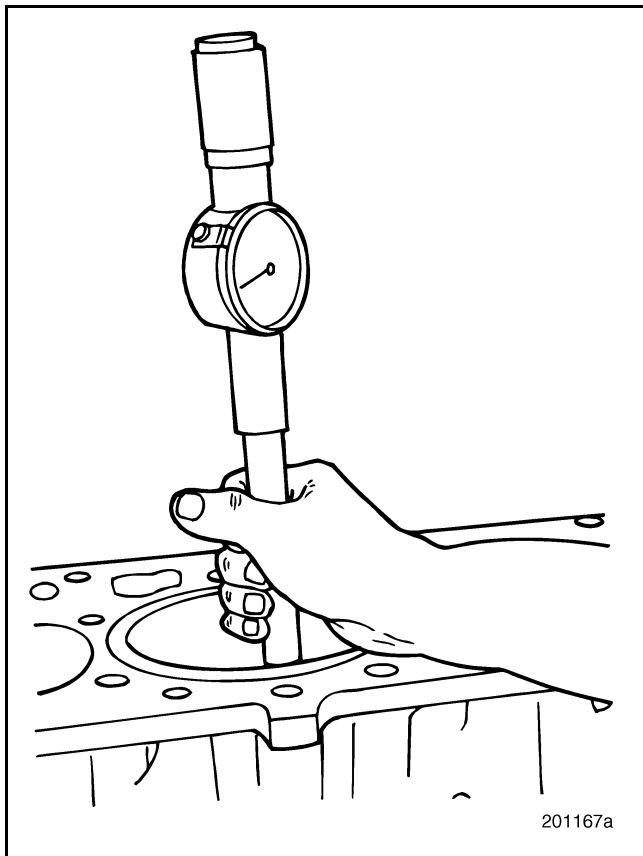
Checking Cylinder Sleeve for Out-of-Round or Taper
